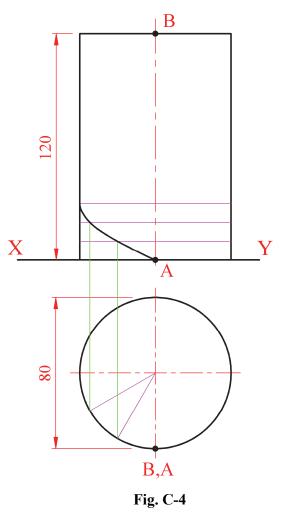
on the right shows the plan and elevation of a partially completed helix.
